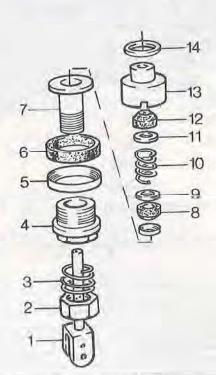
Exploded view of the Standard jet components (Sec 3)
